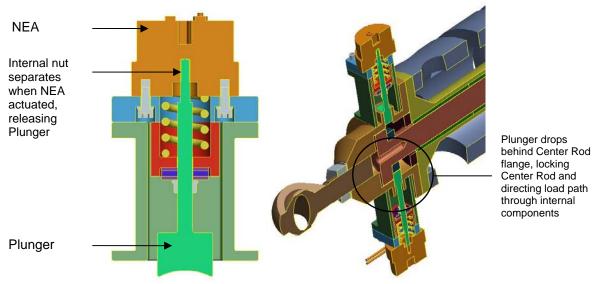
NEA Lockout Mechanism Cross-Sectional View
